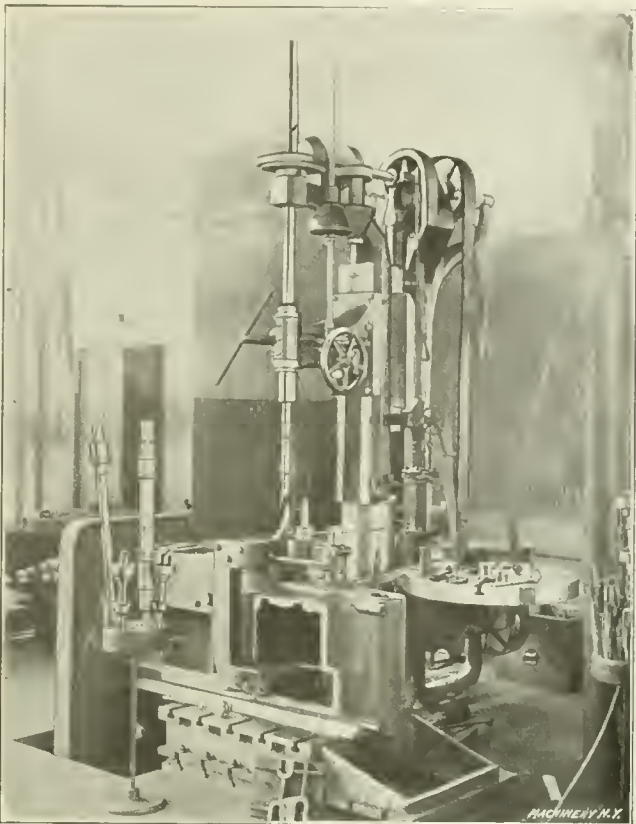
Operation 9b1. Bar located by Spindle Hole and Milled Surface at Edge of Opening
